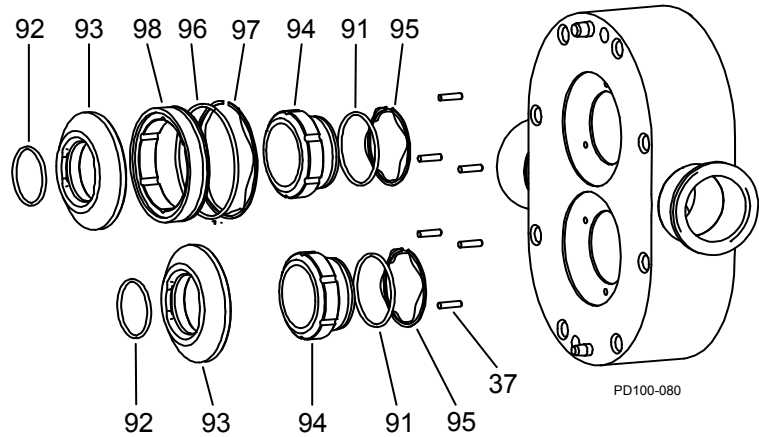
Single (Bottom) and Double (Top) Mechanical Seal
